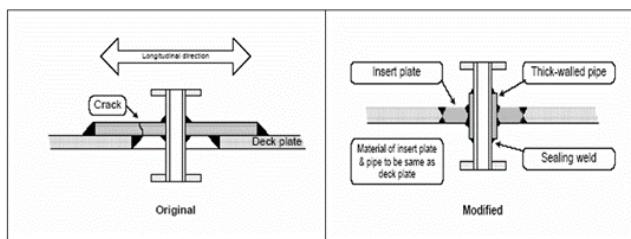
Recommended sketches of damage and repair / modifications for pipe penetrations.
